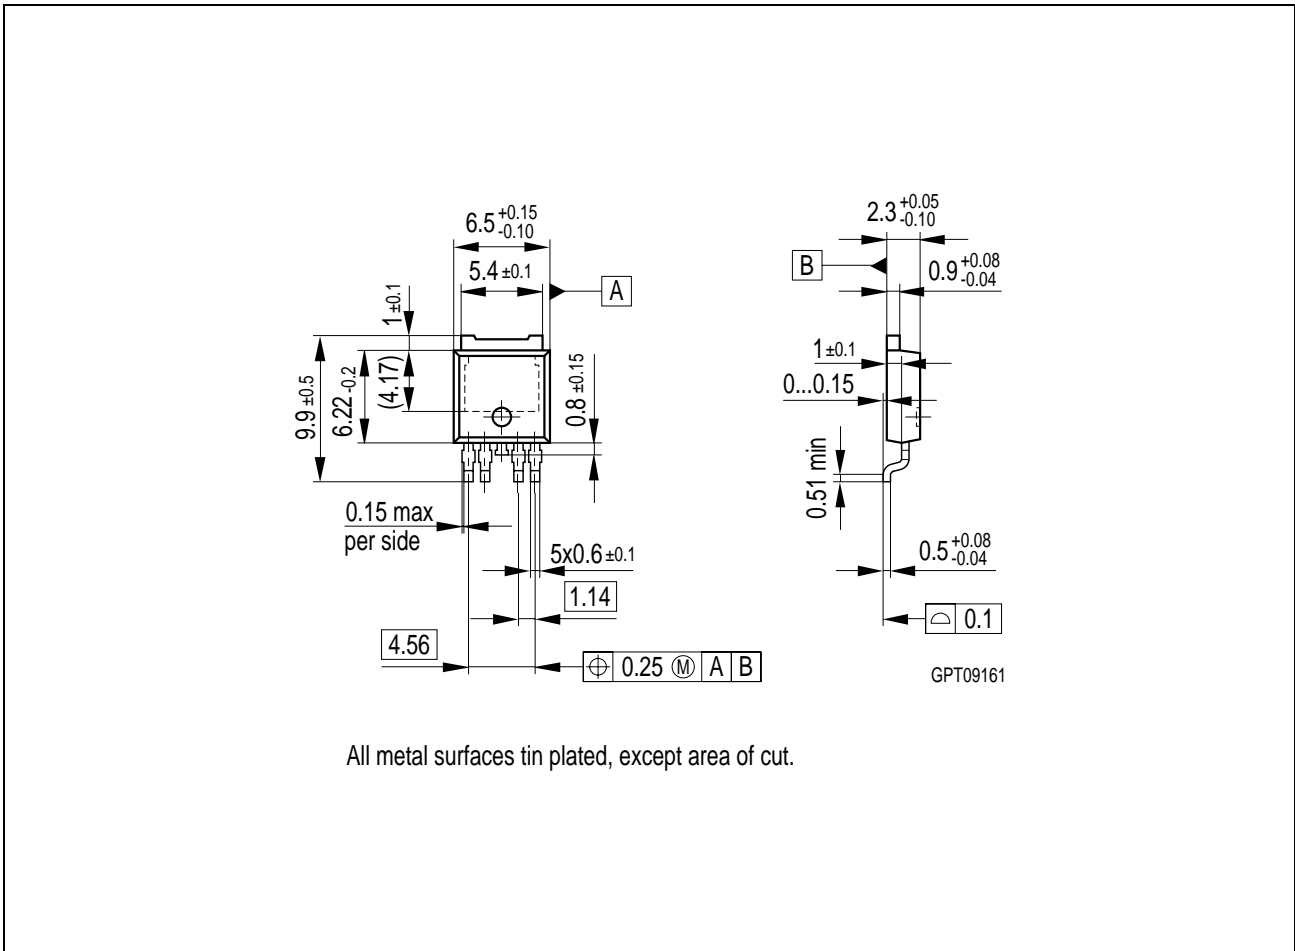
P-TO252-5-1 (Plastic Transistor Single Outline)
